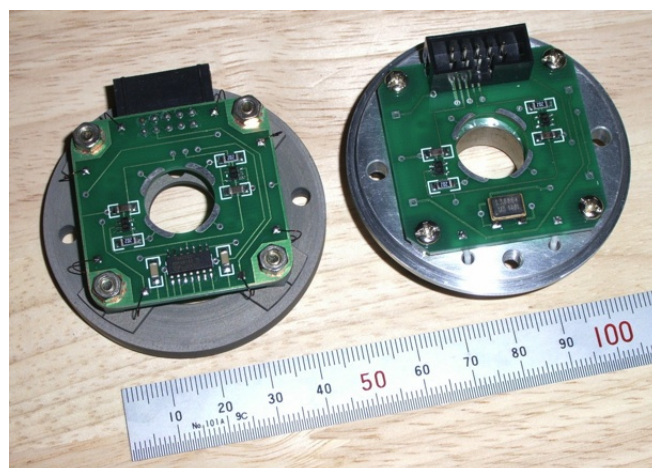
Radial displacement sensors on PCB (coils of radial bearings are routed out from the PCB).
